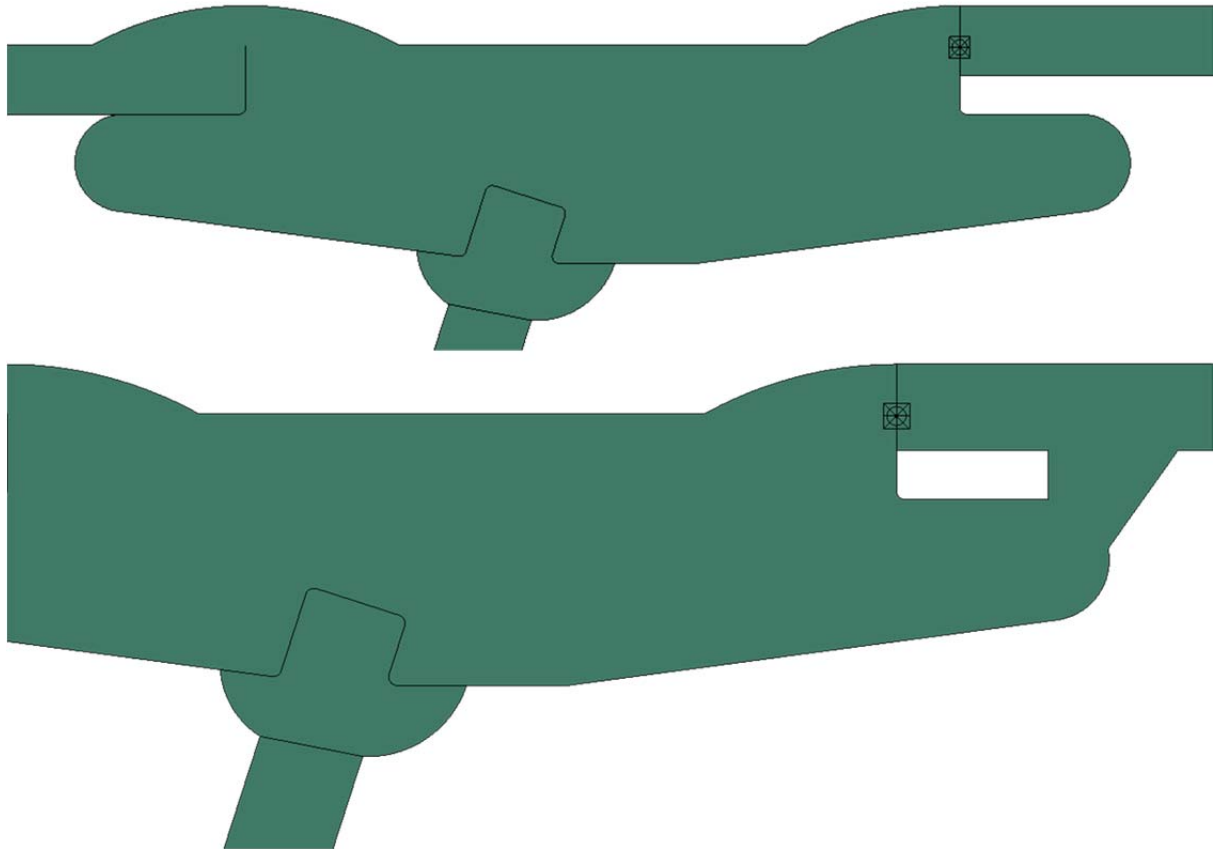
Illustration of the geometry for Case 01 with and without the additional internal fillet weld.
